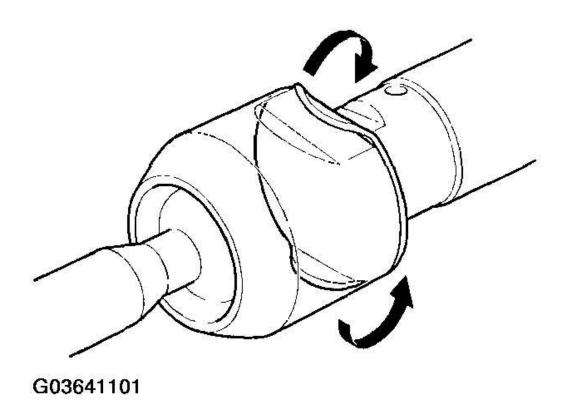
Unbending Lock Washer Courtesy of AMERICAN HONDA MOTOR CO., INC.
